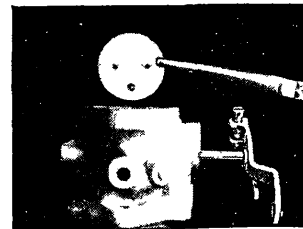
Install throttle shaft and lever, and throttle valve. Small "c" in circle should be toward idle port facing manifold side of flange. Center valve by tapping lightly before tightening screws. Use new screws. Back out throttle lever adjusting screw before installing
